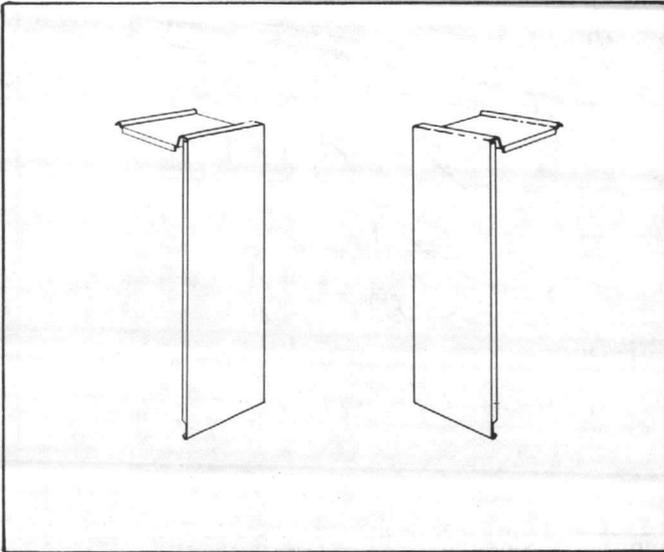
Enclosure Extensions (Left-hand and Right-hand)
